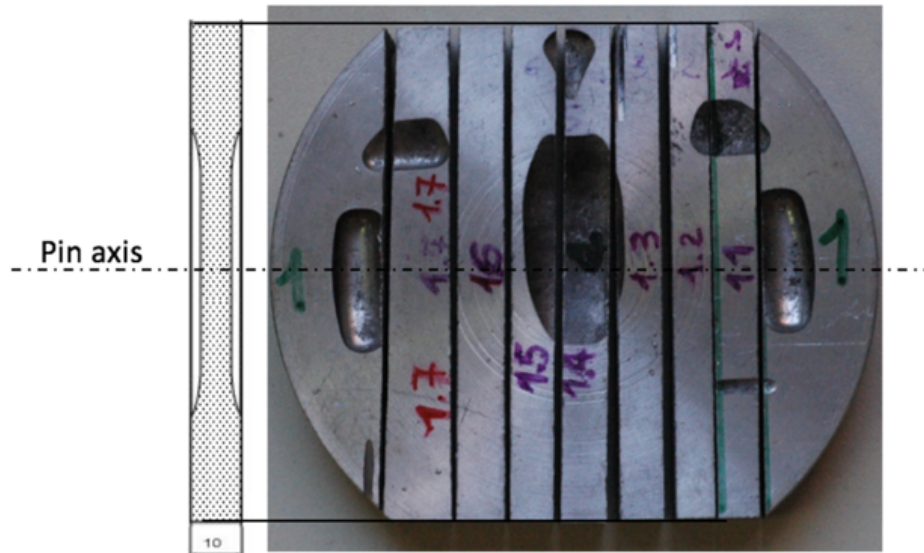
Scheme of tensile specimens, machined from pistons crown.
